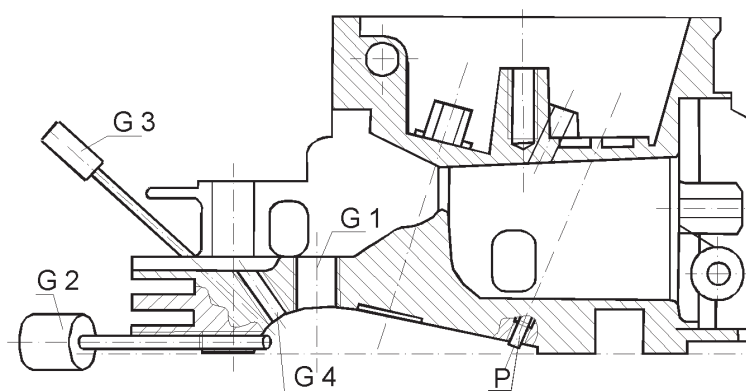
Cylinder head of the GX390 test engine with marked locations of the combustion sensors: G1 – sensor integrated with the spark-plug, G2, G3, G4 – sensors mounted directly in the cylinder head, P – pressure sensor
